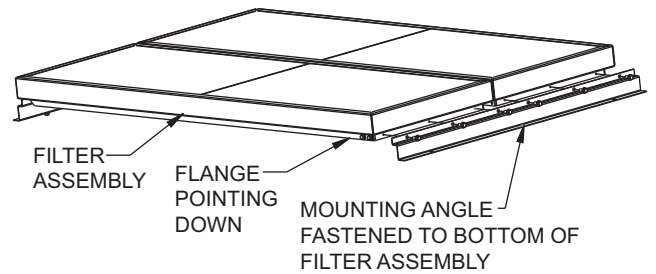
Correctly Assembled Bottom Filter Assembly, Sizes 040-060 Only
